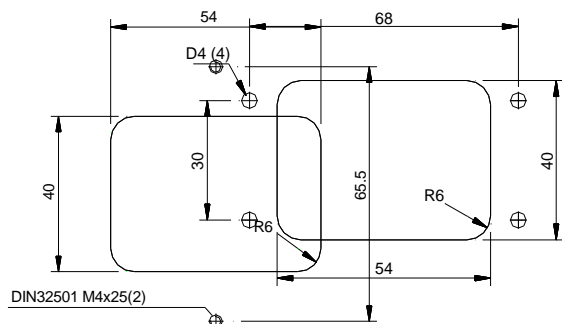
Standard display housing for fixing with welded bolts on control panel
